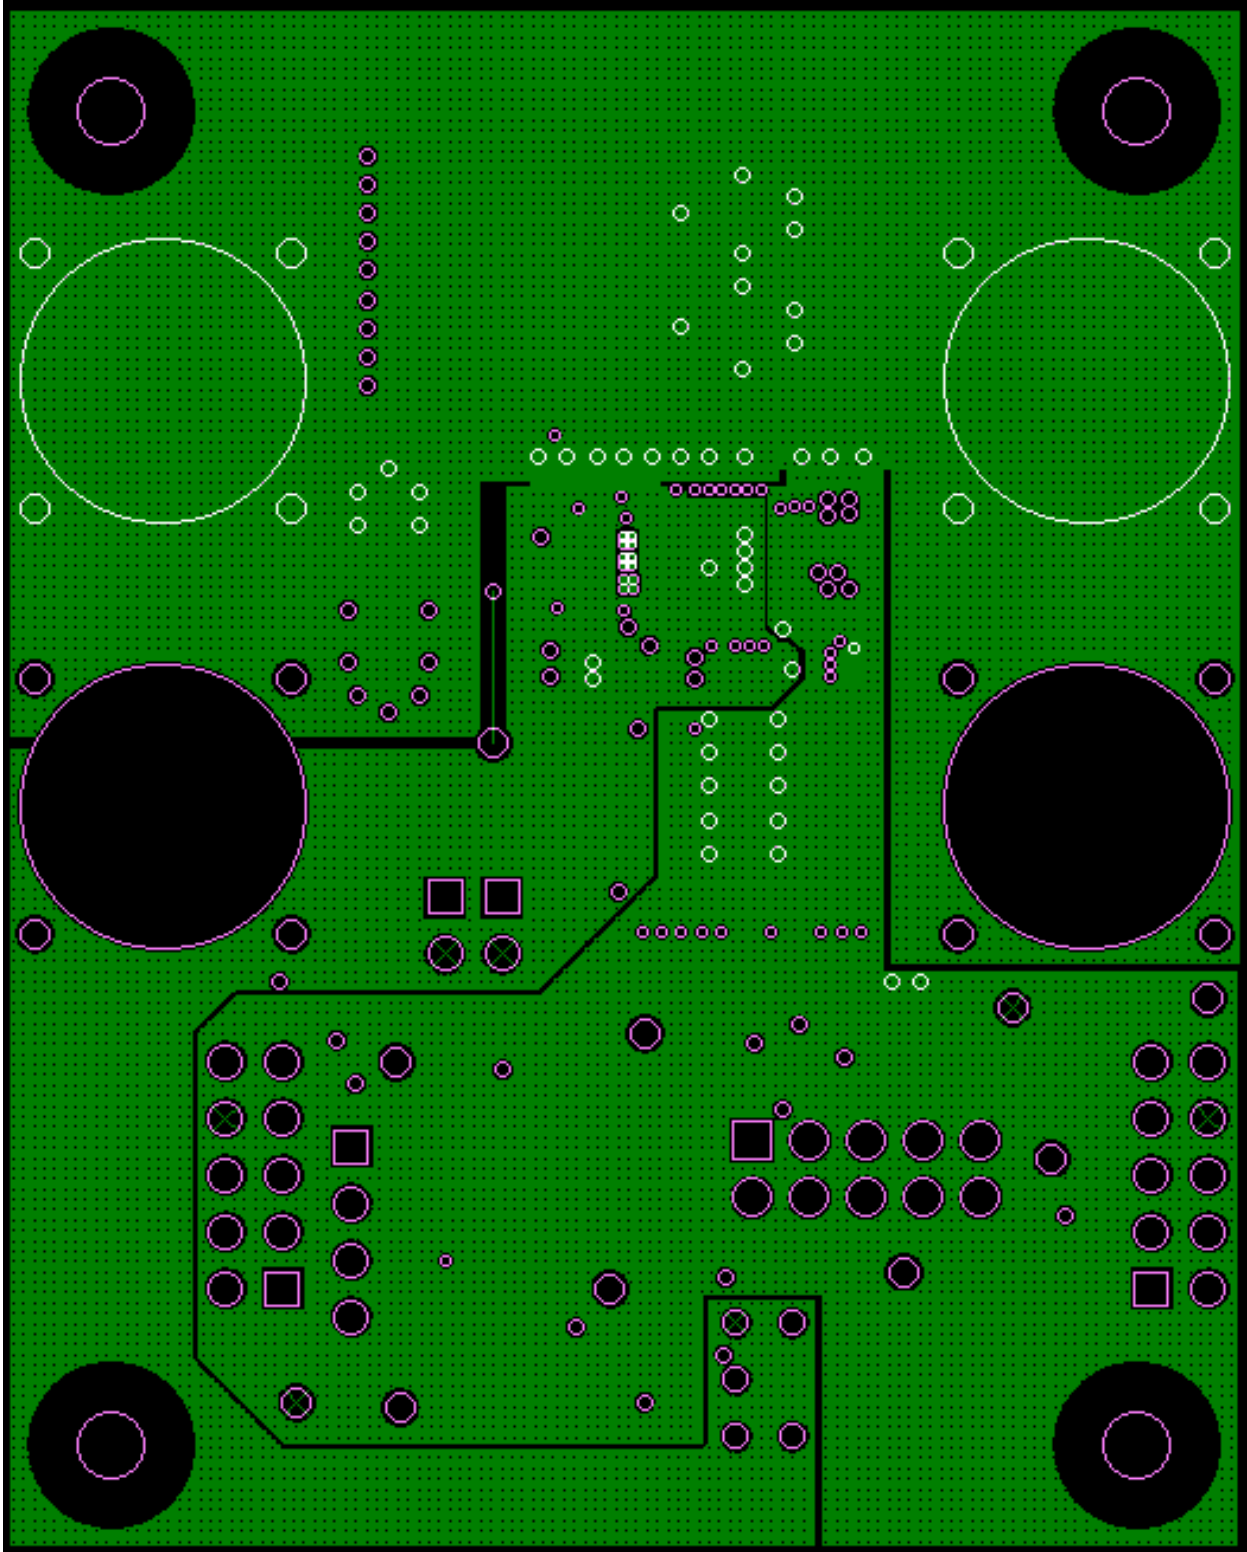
PCB – Inner Layer 1 (Viewed from Top)
